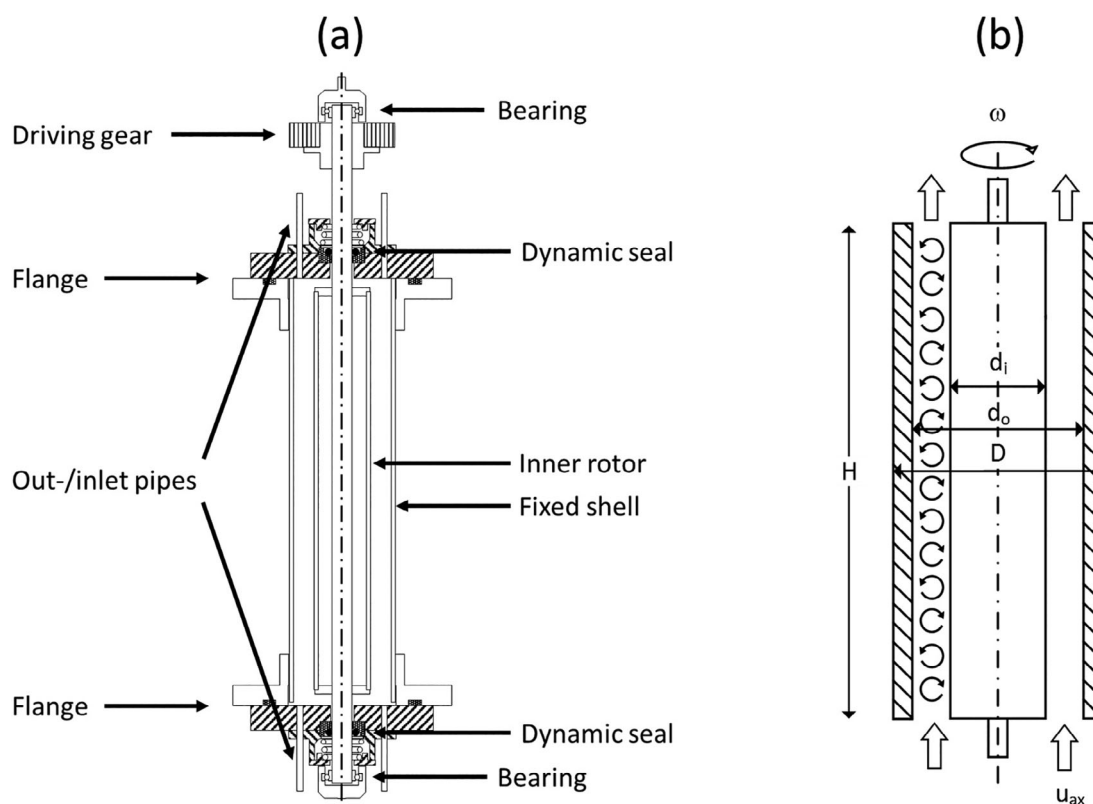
Technical drawing (a) showing a typical TCR setup and schematic depiction (b) defining the design parameters. Technical drawing redrawn based on Kataoka et al.⁷⁹
